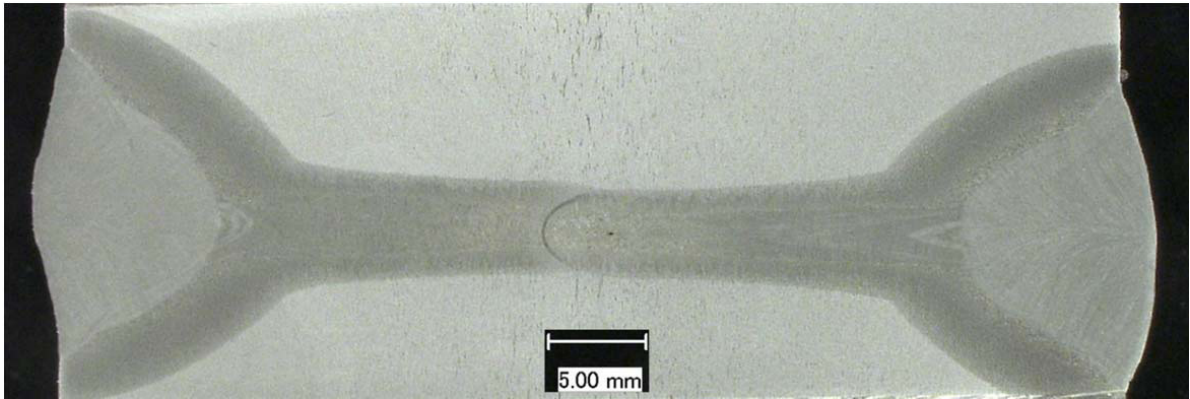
Sample of laser beam submerged arc hybrid connection weld at S460 with 51 mm wall thickness.
